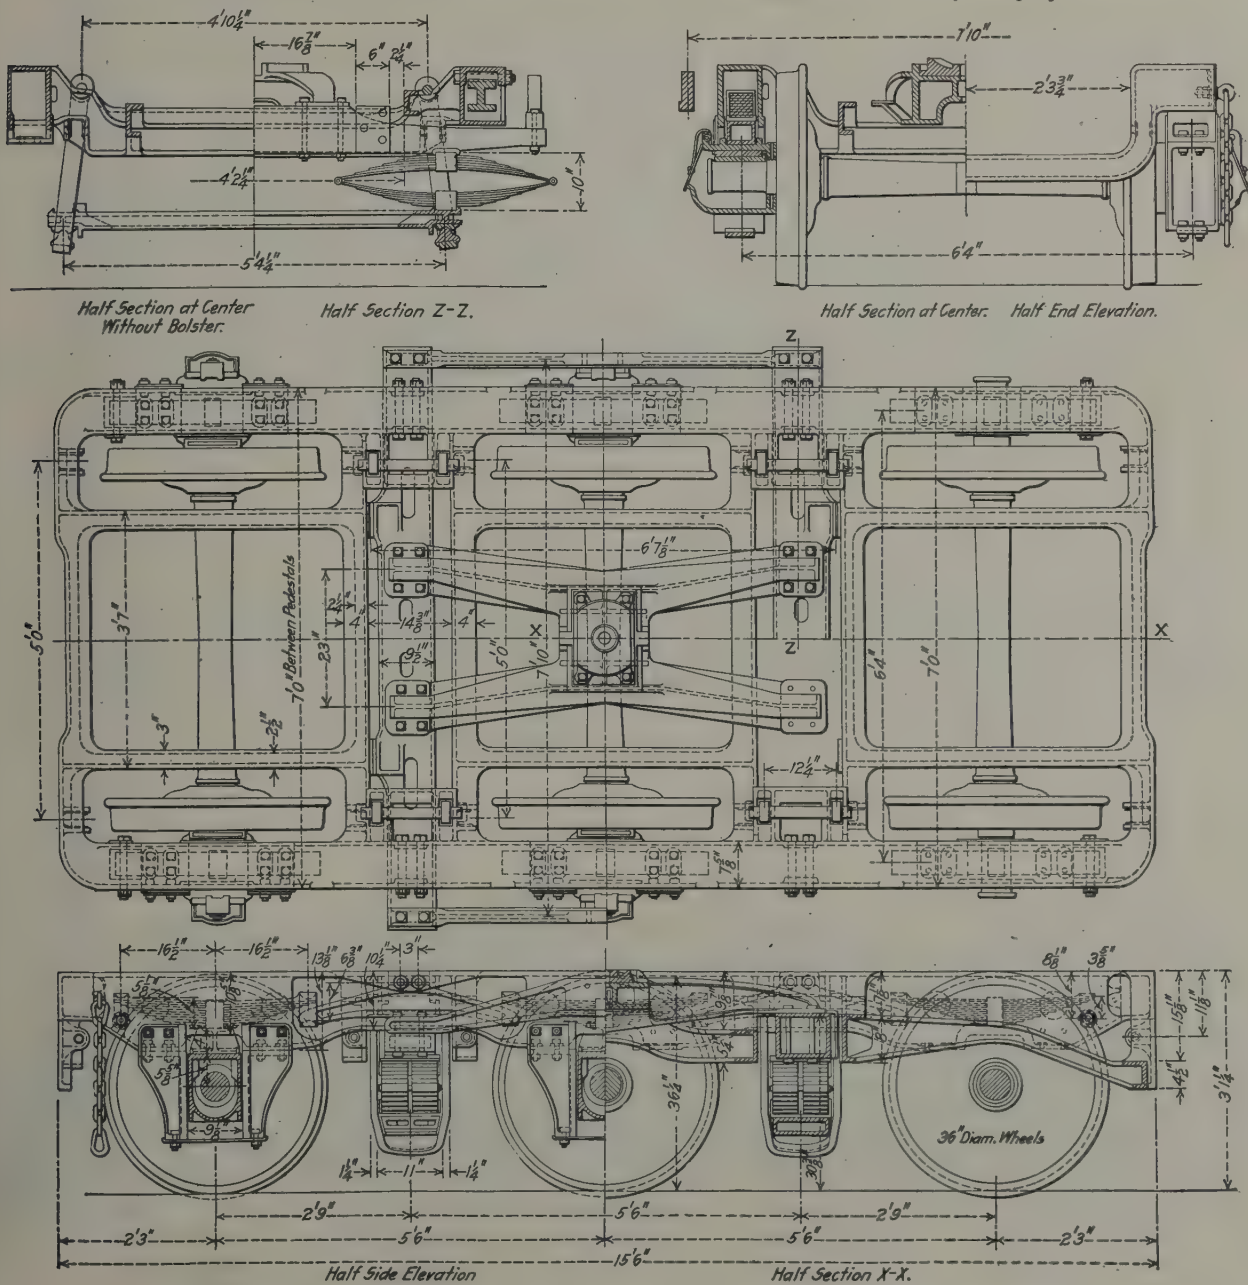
New York Central Six-Wheel Truck with Top Equalizer Clasp Brake Arrangement.
